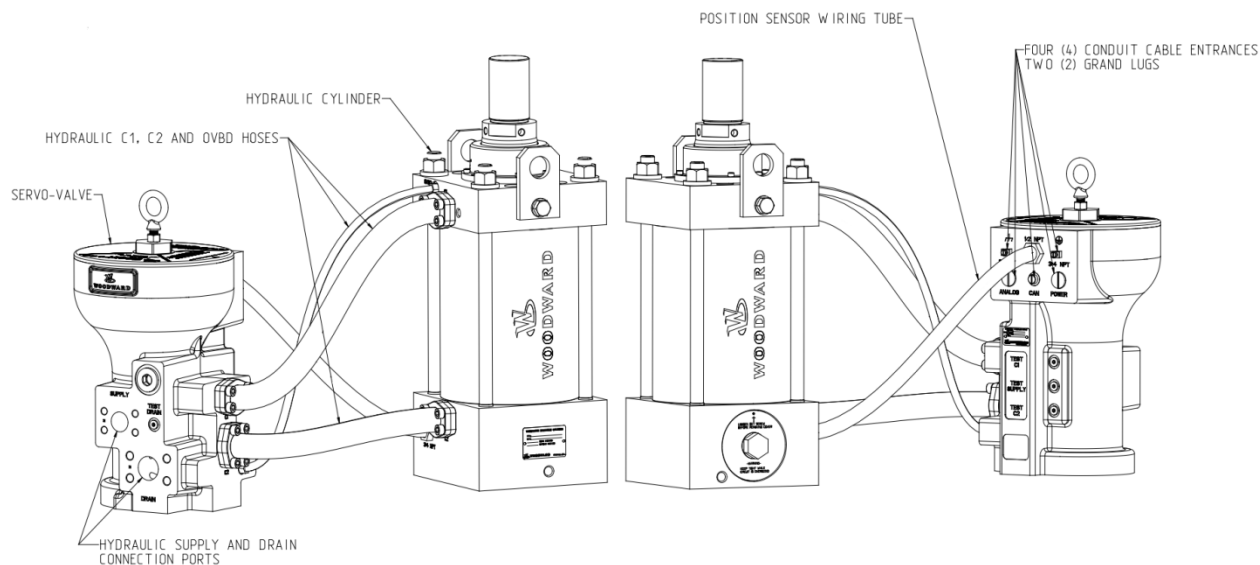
Basic Mechanical Components and Installation Interfaces
